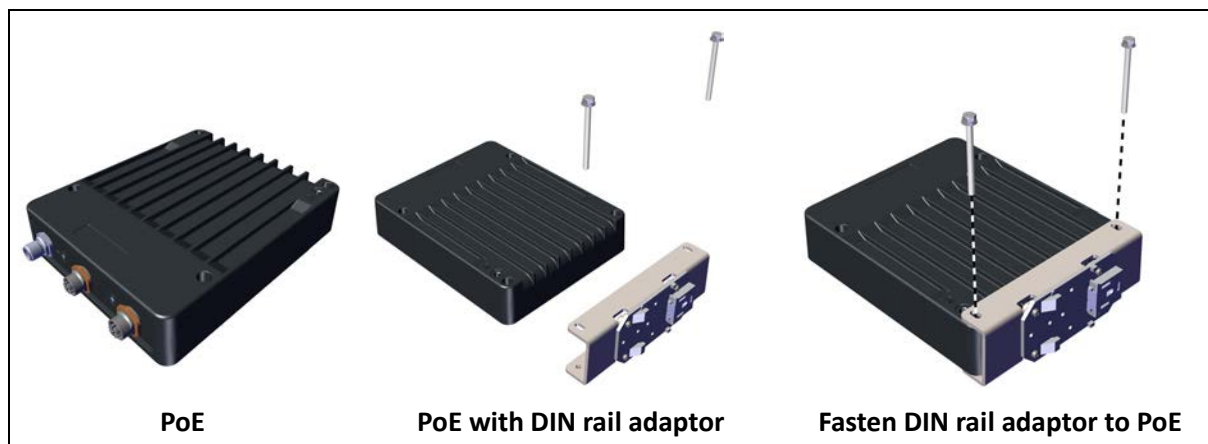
Attaching a DIN rail adaptor to the PoE
